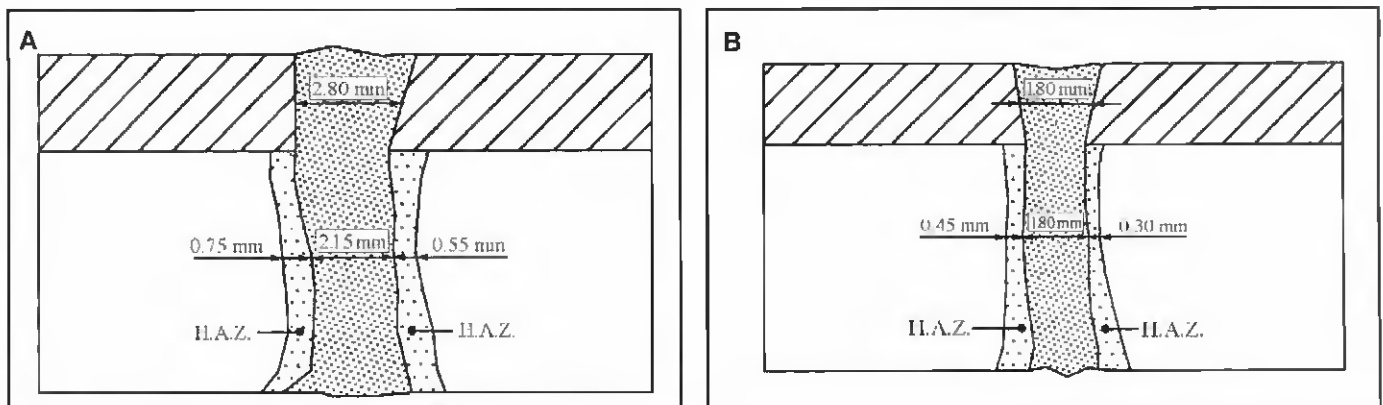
Sketches of the welded sections: A — dual LBW; B — single-side LBW.
